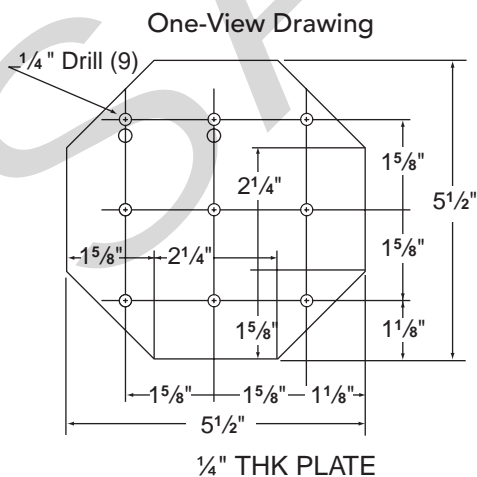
This one-view drawing shows a flat object. What objects do you think could be shown appropriately using a one-view drawing?
